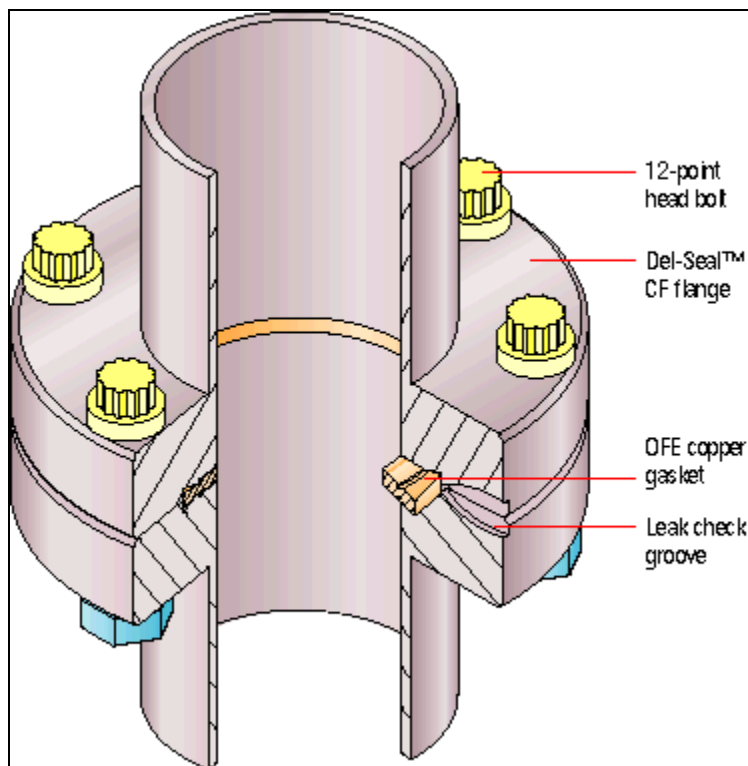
Cutaway view of CF assembly. From MDC Vacuum Catalog.
